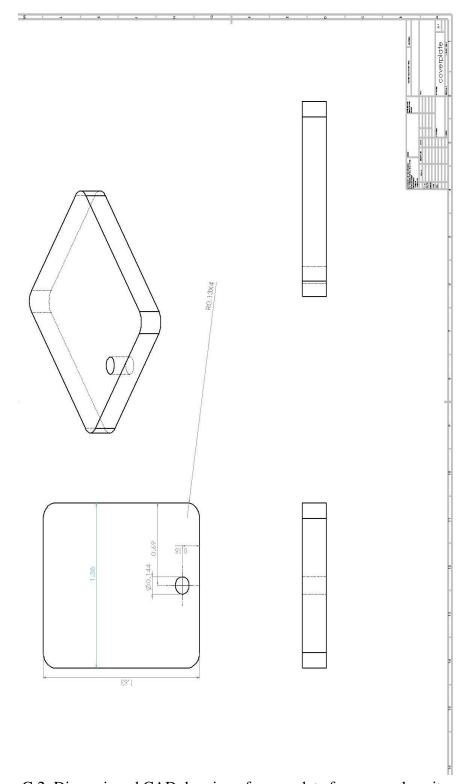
Dimensioned CAD drawing of cover plate for recessed cavity.
